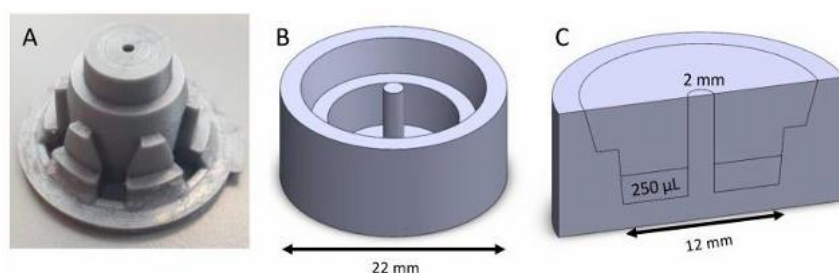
Silicone mold design. Custom-made 3D-printed casts provide the shape for the silicone mold (left); the silicone mold has a diameter of 22 mm (middle) and a centrally placed post of 2 mm (right).
